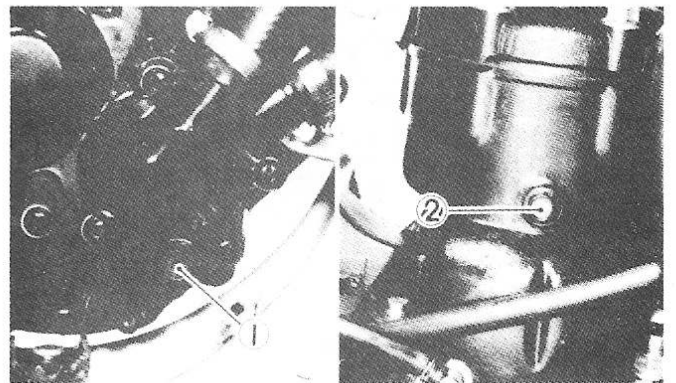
When draining the coolant, remove the pump cover drain bolt (1) and the cylinder drain bolt (2) (Sec 45)
